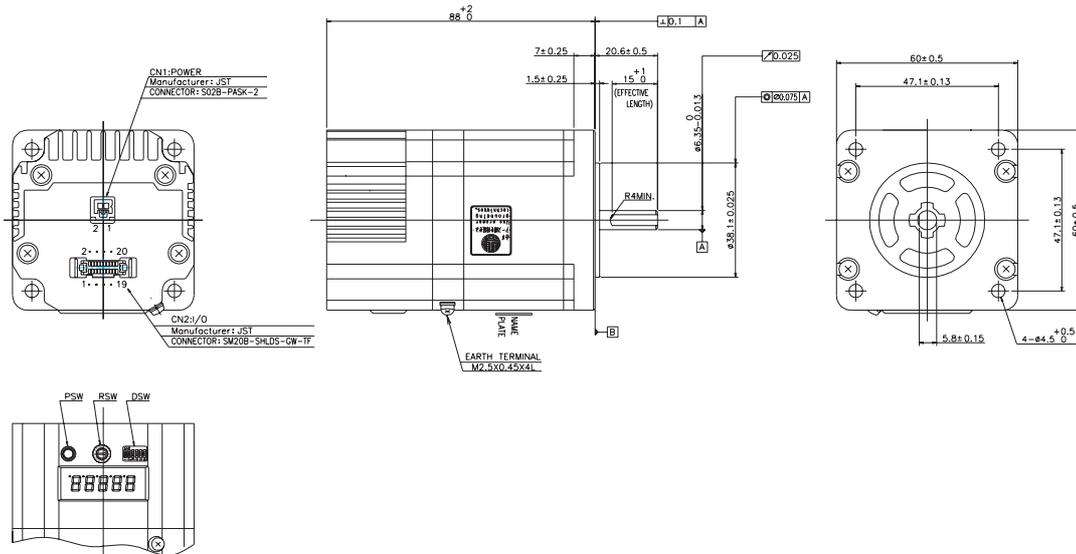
Exterior view of the 60 mm sq. DB22M162S-01
